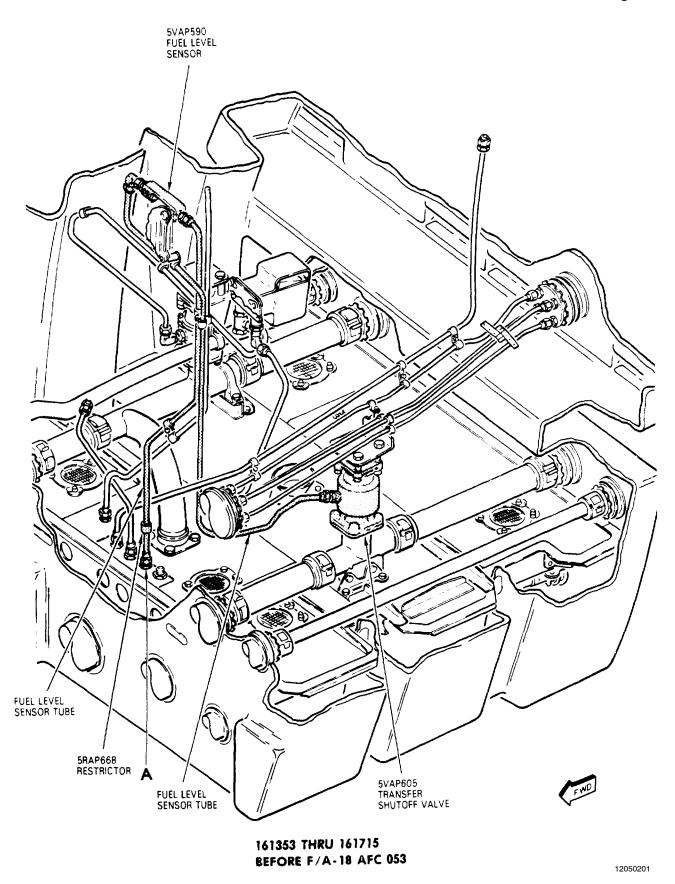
No. 3 Fuel Tank Cycle Test Troubleshooting Component Locator (Sheet 1 of 3)
